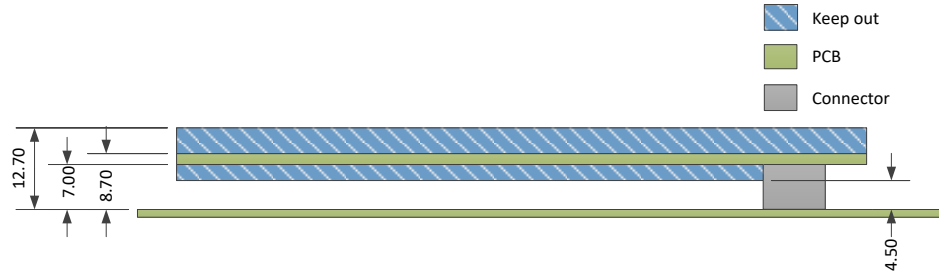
MitySOM-A5E Mini Module Clearance - Side View, all dimensions in mm
